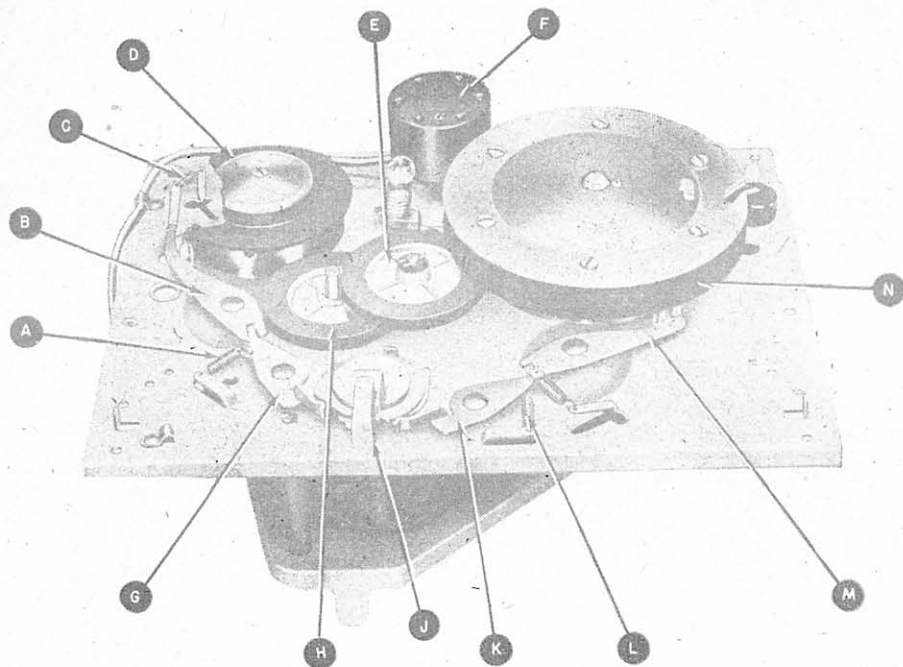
Webster Model 80 wire recorder mechanism. Keyed parts are as follows: (A) "Heavy" brake spring on supply spool; (B) Brake lever; (C) "Light" brake spring on supply spool; (D) Supply spool; (E) Idler wheel; (F) Head; (G) Brake actuating lever; (H) Motor shaft and drive wheel; (J) "Operate" switch and lever; (K) Brake actuating lever; (L) "Heavy" brake spring on takeup spool; (M) Brake lever; and (N) Takeup spool.
